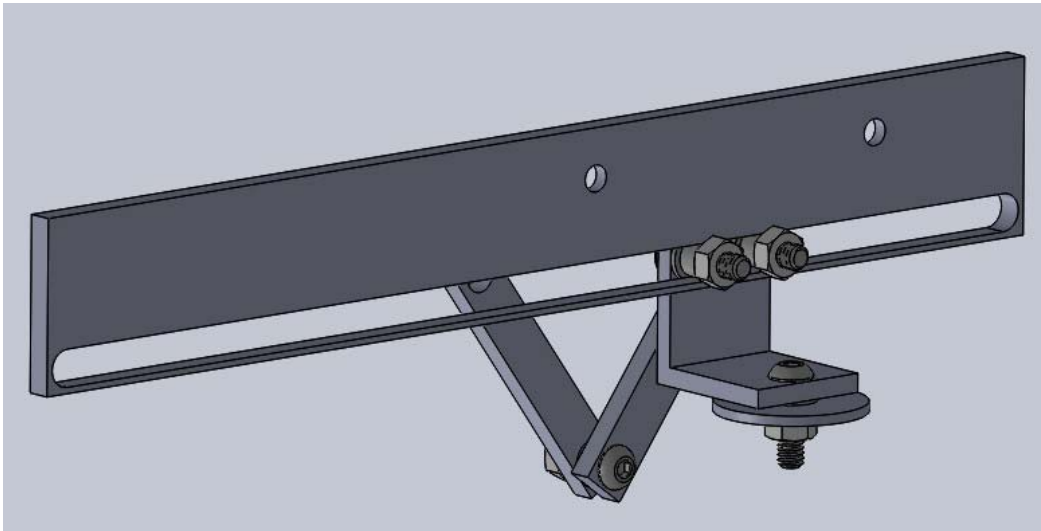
Disc cutter connected to 2 bar linkage used to cut the parchment paper.
